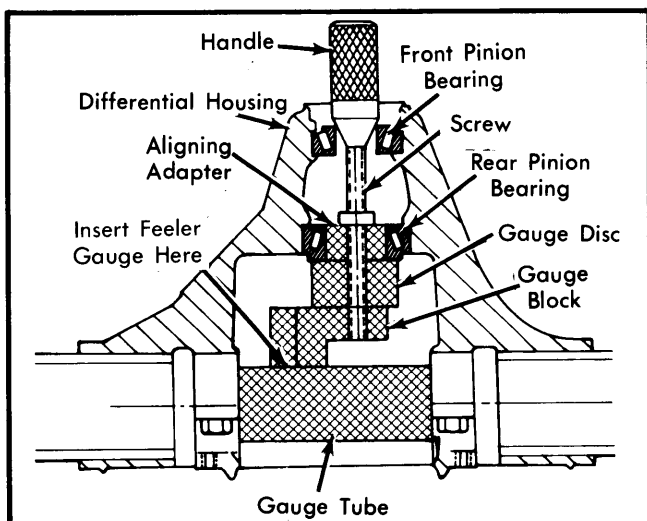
Sectional View Showing Installation of Pinion Depth Measuring Tools
